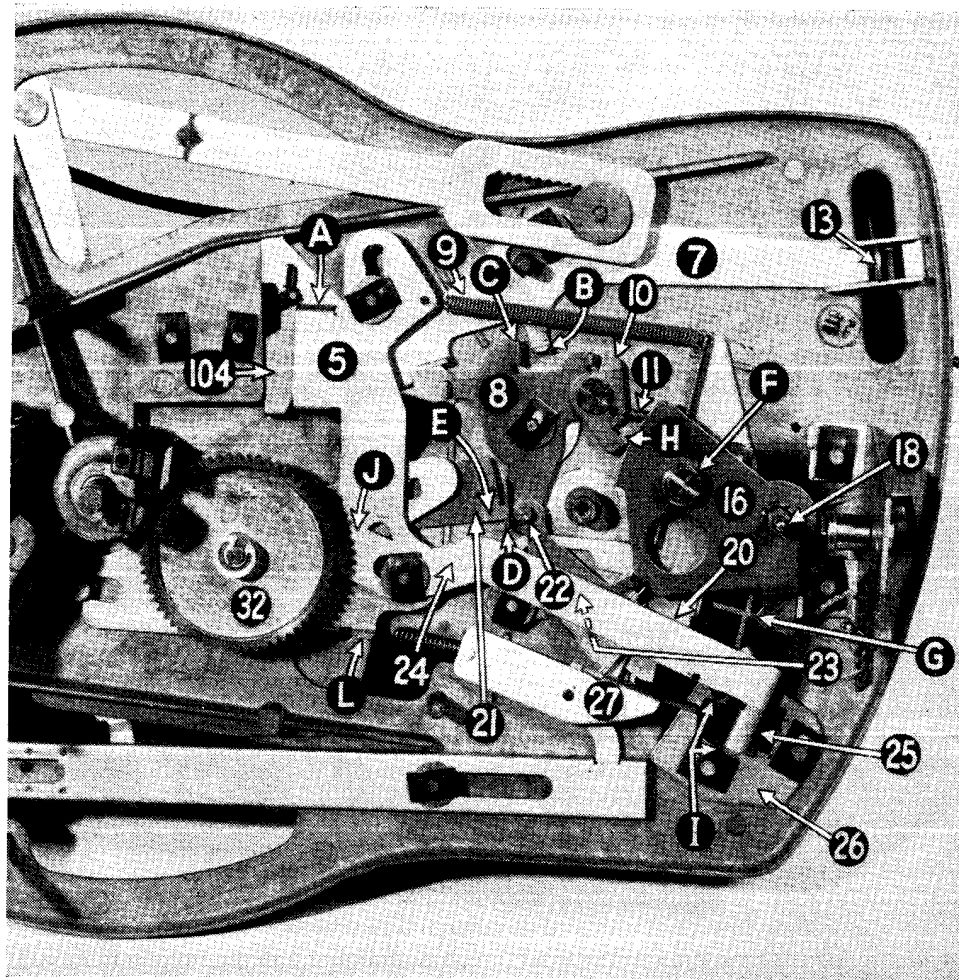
The mechanism exposed when the main cam gear wheel (52 in Fig. 3) is removed
